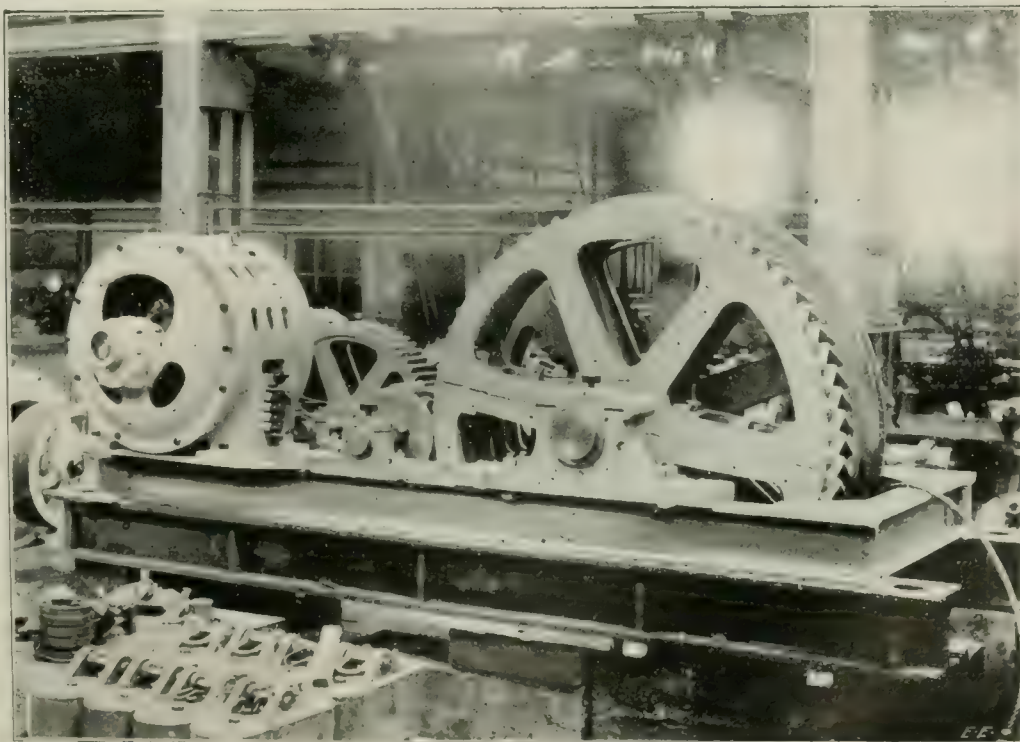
"SANDYCROFT" HAULAGE GEAR.
